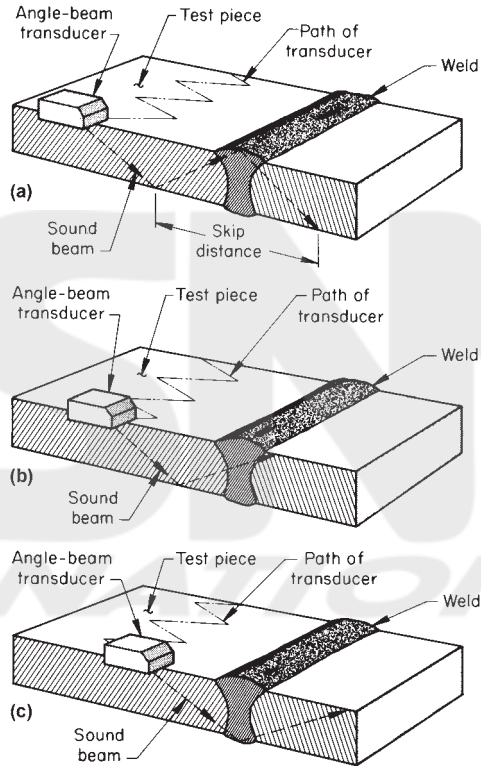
Three positions of the contact type of transducer along the zigzag scanning path used during ultrasonic inspection of welded joints. The movement of the sound beam path across the weld is shown on a section taken along the centerline of the transducer as it is moved (a) from the far left position in the scanning path, (b) through an intermediate position, (c), to the far right position. Source: Ref 1
